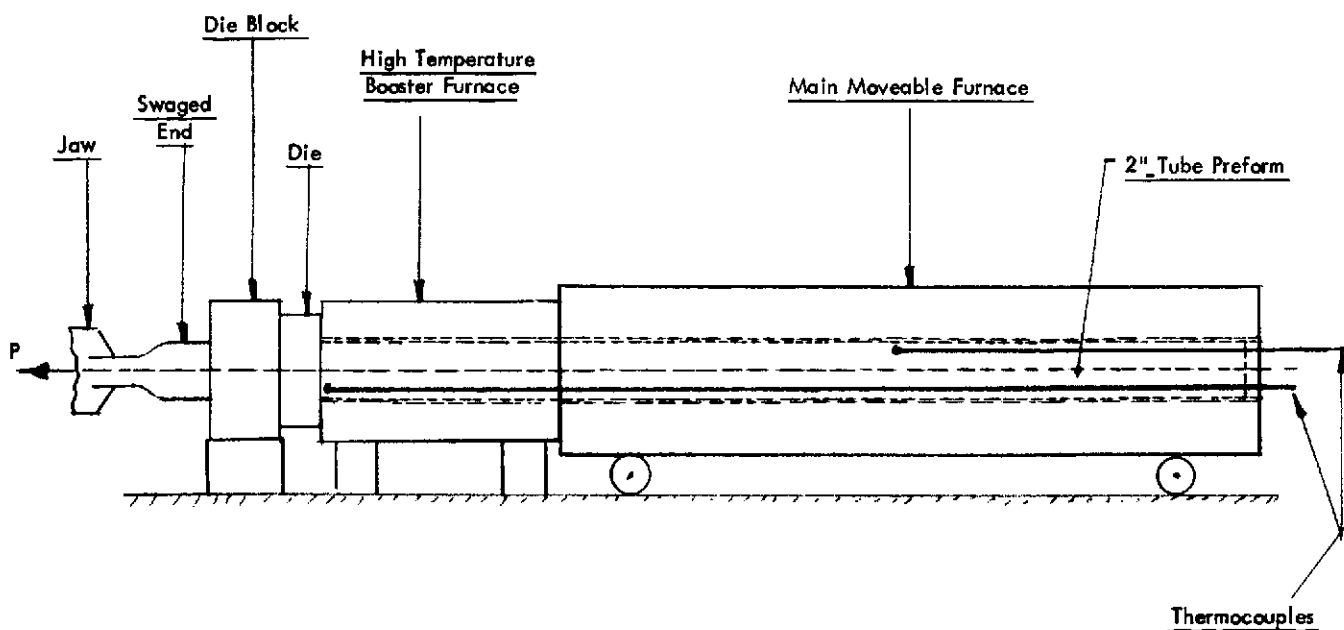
Arrangement of Resistance Furnaces Located in the Draw Bench Bay (not shown) for Hot Drawing of 2" (0.0508m) Tubes, A Schematic.
